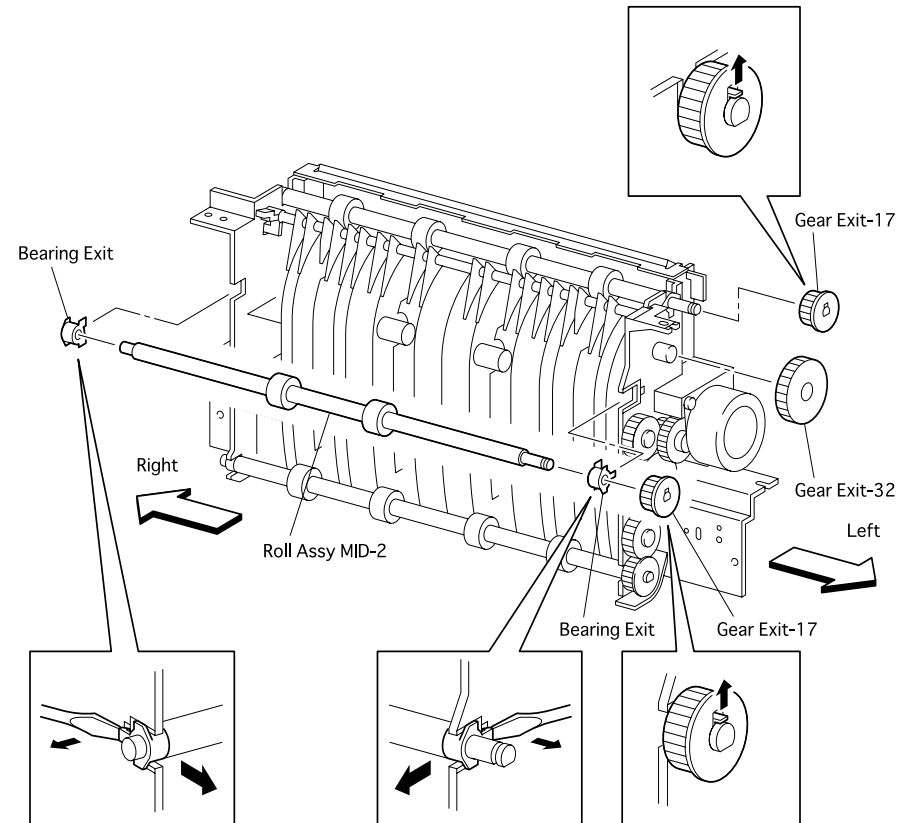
Removal of Bearing Exit and Roll Assy MID-2
